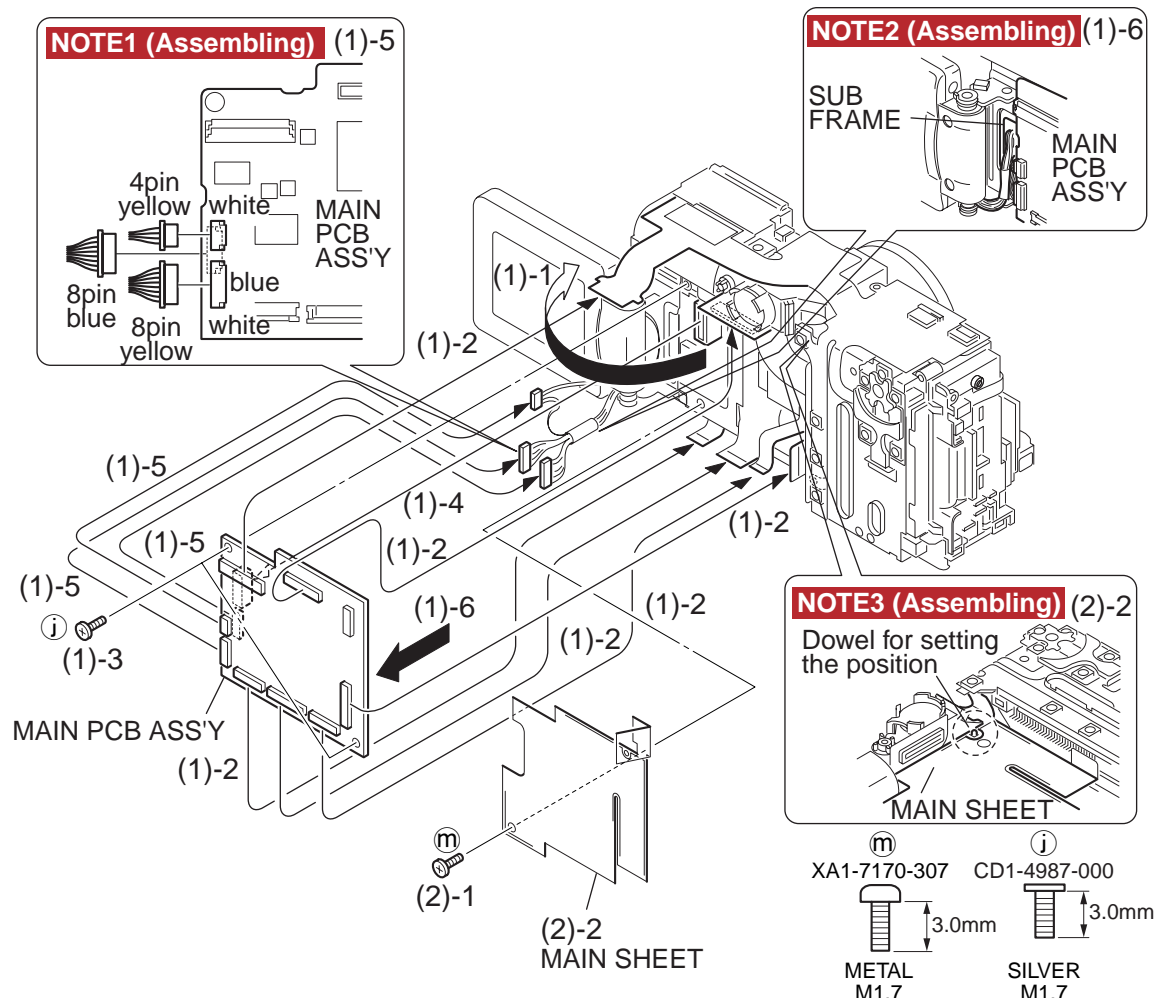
MAIN PCB ASS'Y, MAIN SHEET
